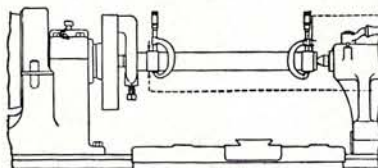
Testing Alignment of Headstock and Tailstock by Machining a Piece Between Centers.
